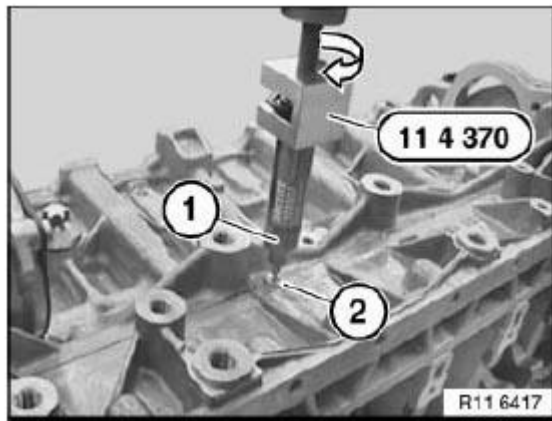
Inserting Liquid Sealing Compound Using Special Tool 11 4 370
